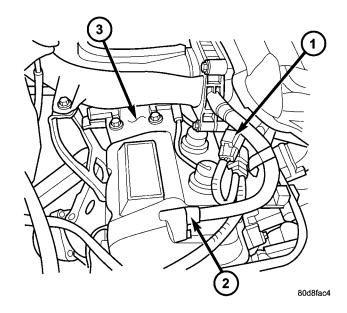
IGNITION COIL, PCV, MAP SENSOR
